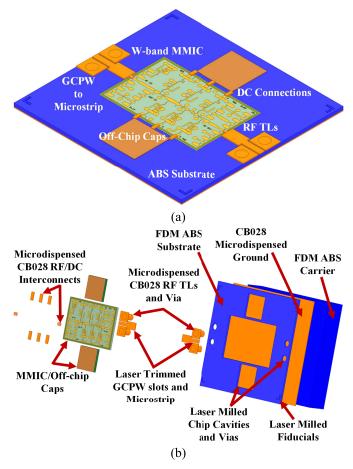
(a) Isometric and (b) exploded illustrations of the LE-DPAM *W*-band LNA chip-carrier assembly.
